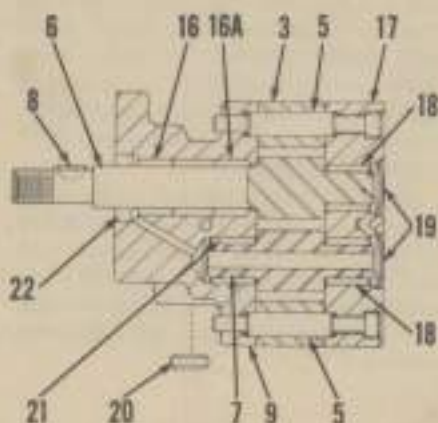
Cross-sectional view of Webster power steering pump showing bearing and seal location. Refer to Fig. 16 and Fig. 17 for exploded views.
